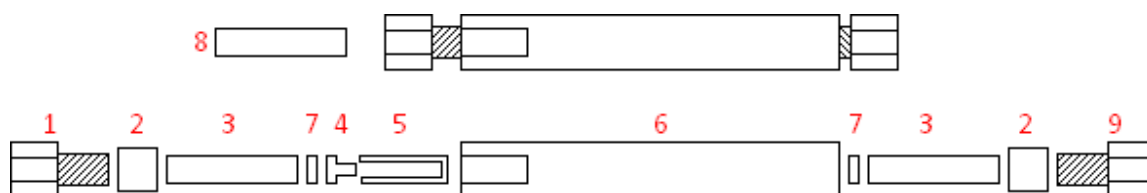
easyLab Mcell 10 General Assembly drawing, 1 - Upper lock nut. 2 - Ceramic piston cap. 3 - Ceramic piston. 4 - PTFE plug. 5 - PTFE cap. 6 - Pressure cell body. 7 - Anti-extension ring. 8 - Tungsten-Carbide piston. 9 - Lower lock nut
